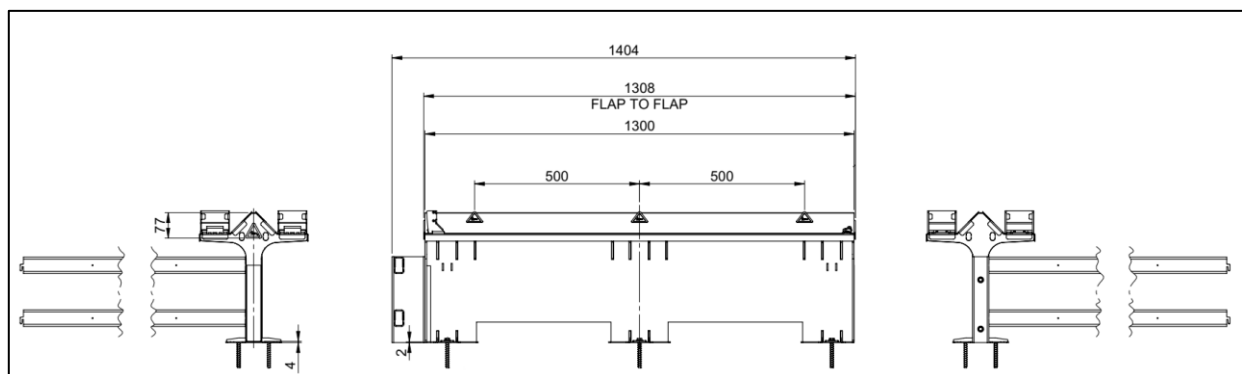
Pallet Station Expansion (E) outline (all measurements in mm)
